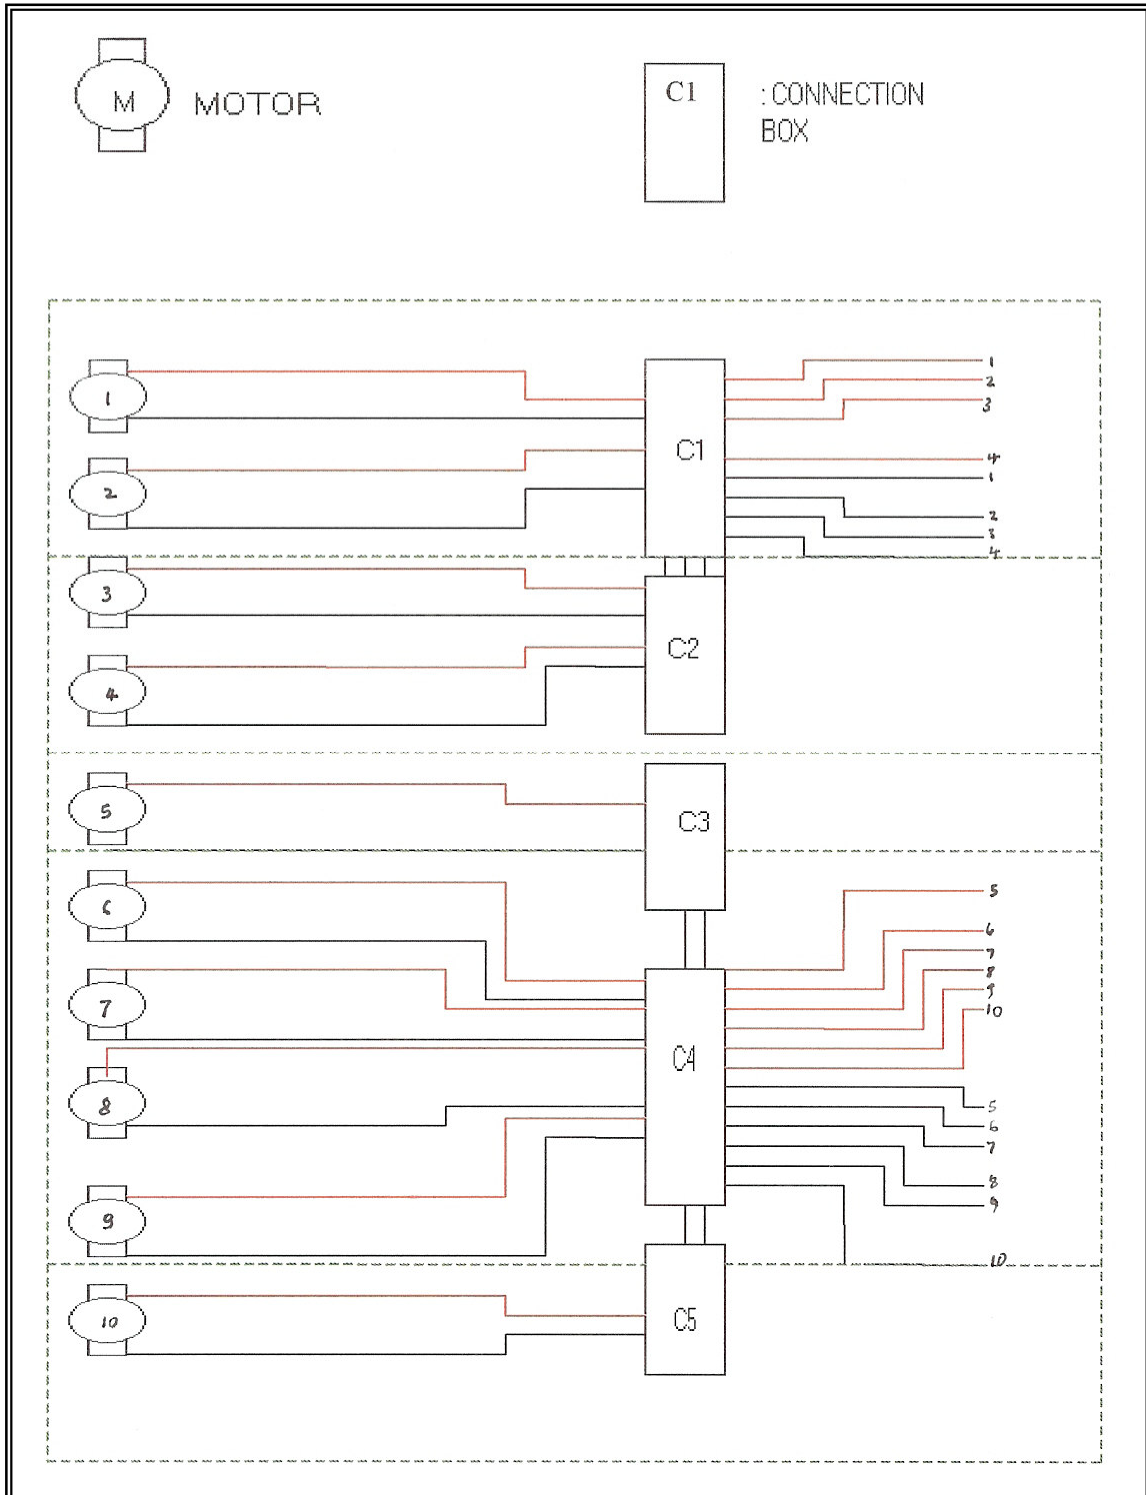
Wiring Diagram of the Conveyor Driver Motors
